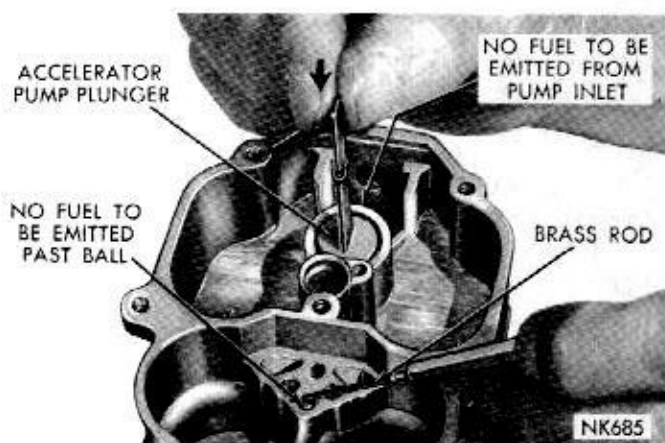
Testing Accelerator Pump Intake and Discharge Check Balls
